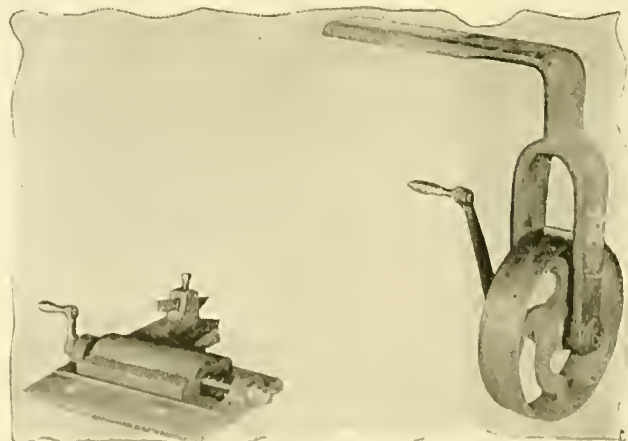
PARTS OF MACHINE FOR TURNING COMMUTATORS.
